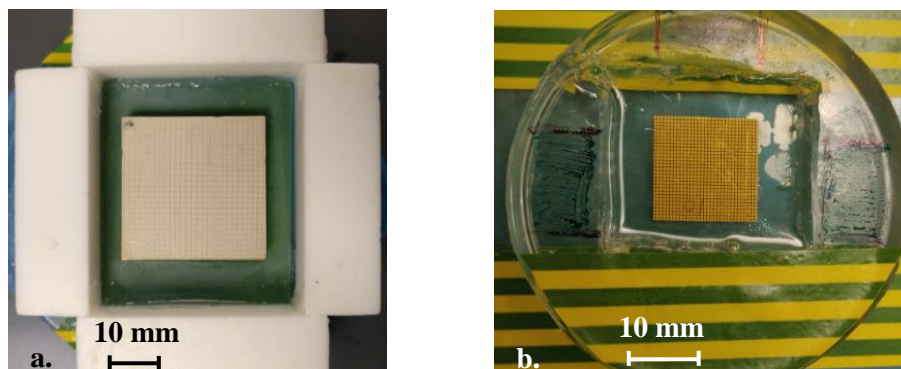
Fixtures Used for Filling the Diced Samples with Polymer: a. 3D Printed Blocks for Larger Samples; b. PDMS Fixture for Smaller Samples
